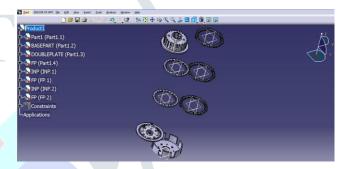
3-D representation of Exploded View of Wet Multi-plate Clutch.
